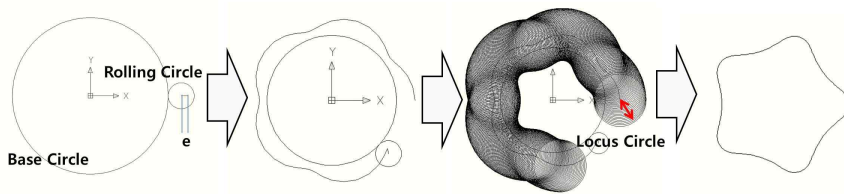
Epi-trochoid Gerotor Design - Inner Rotor
